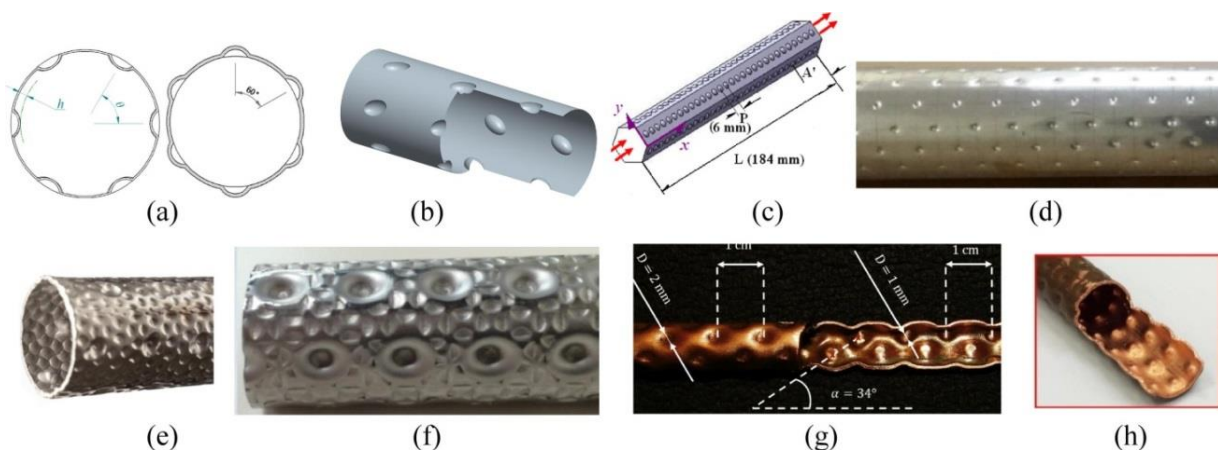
a — dimpled and curved tubes; b — a tube with elliptical dimples; c — a hexagonal dimpled tube; d — a tube with alternating dimples and bulges; e — a dimpled tube; f — a dimpled stainless steel tube; g — geometric parameters of the holes; h — a dimpled copper tube
